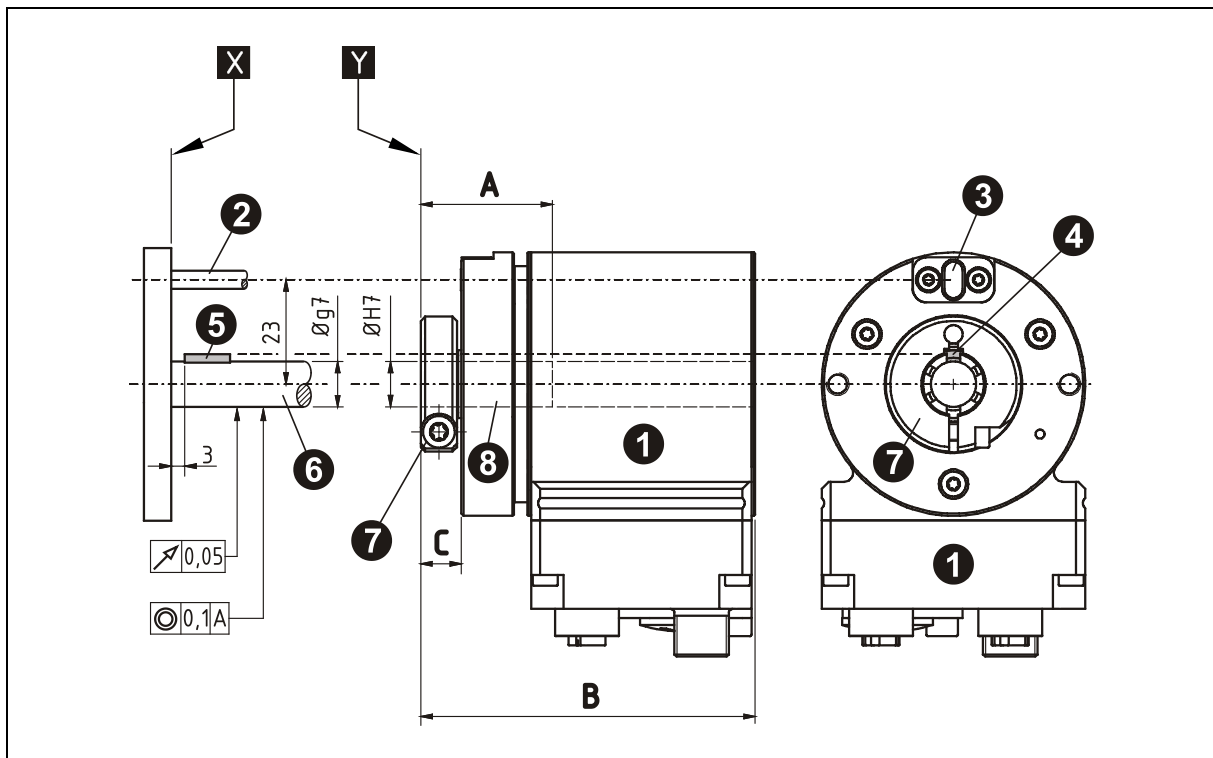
Installation with dowel pin and groove insert, illustration showing the principle
